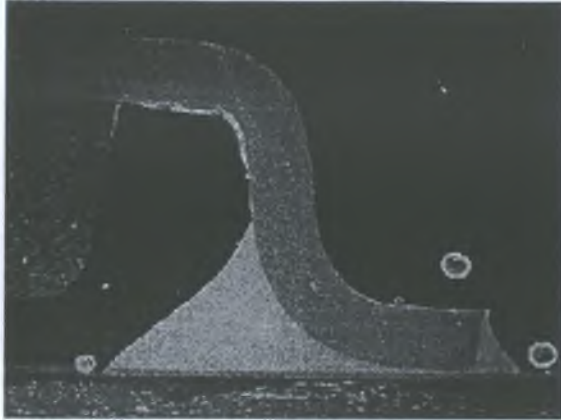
Sn/Pb finish component with Castin Lead-free solder paste.
